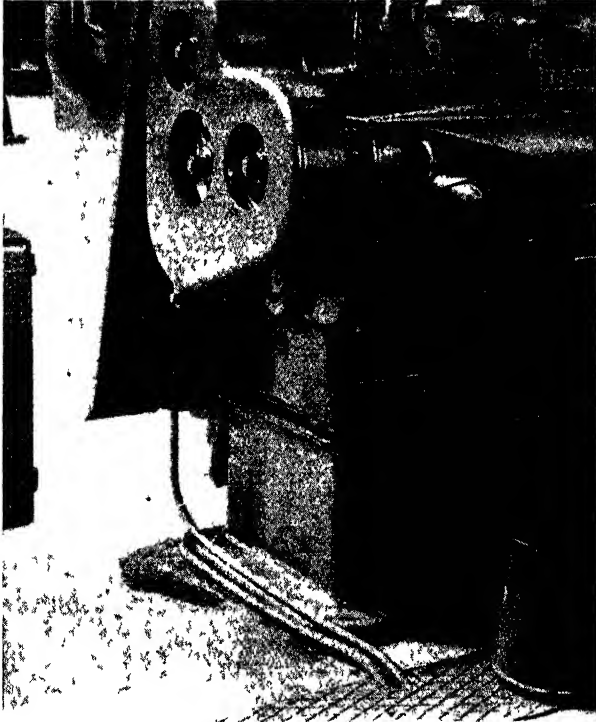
3 CORE ARMOURFD CABLES USED FOR STATOR AND ROTOR LEADS TO MOTOR
